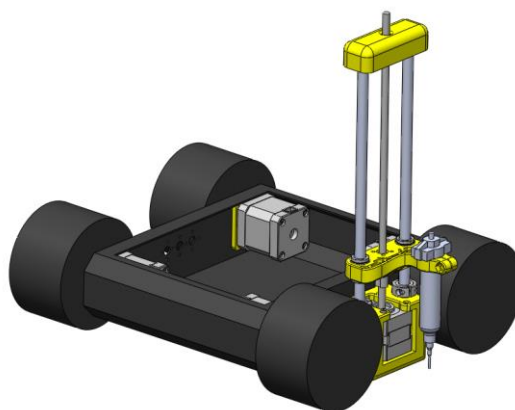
SolidWorks assembly highlighting the design of the mobile platform and how 3D printed parts interface with sourced components.
